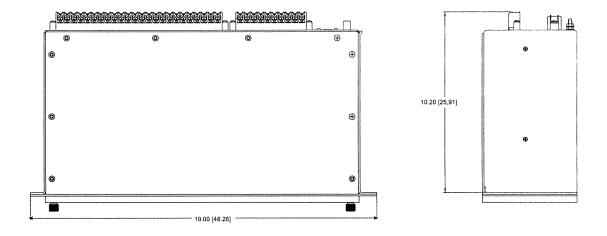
through 5-4 contain physical dimensions of the relay that may be required for mounting the unit on a rack.
